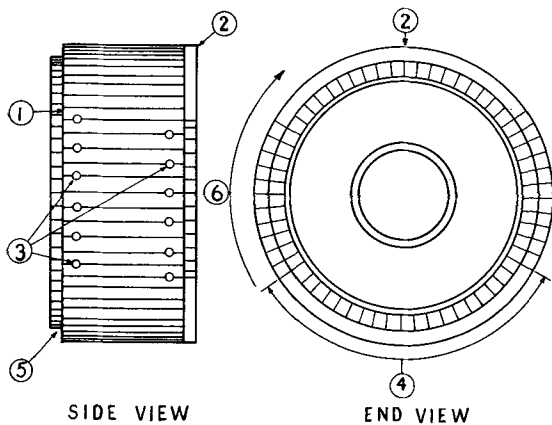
Machined output commutator. 1—Index bar; 2—shorting strap; 3—holes tapped for machine screws; 4—large segment; 5—shoulder turned for connecting straps; 6—direction of rotation.
